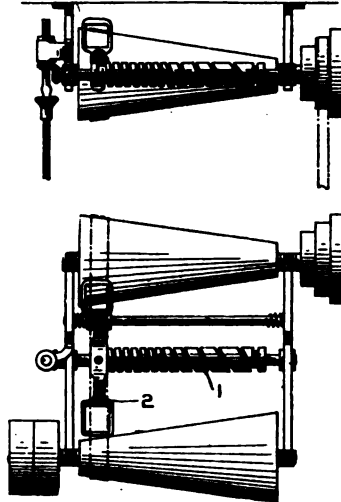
COUNTERSHAFT FOR CUTTING-OFF MACHINE TO GIVE CONSTANT CUTTING SPEED
